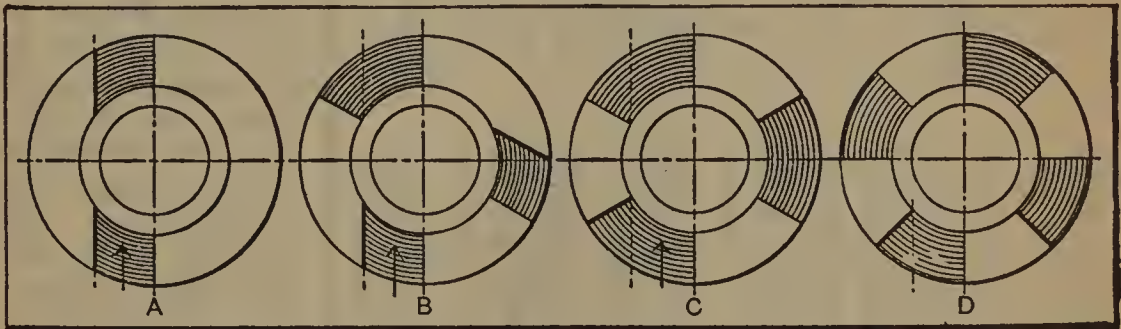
Diagrammatical View Showing Method of Cutting Clutch Teeth
